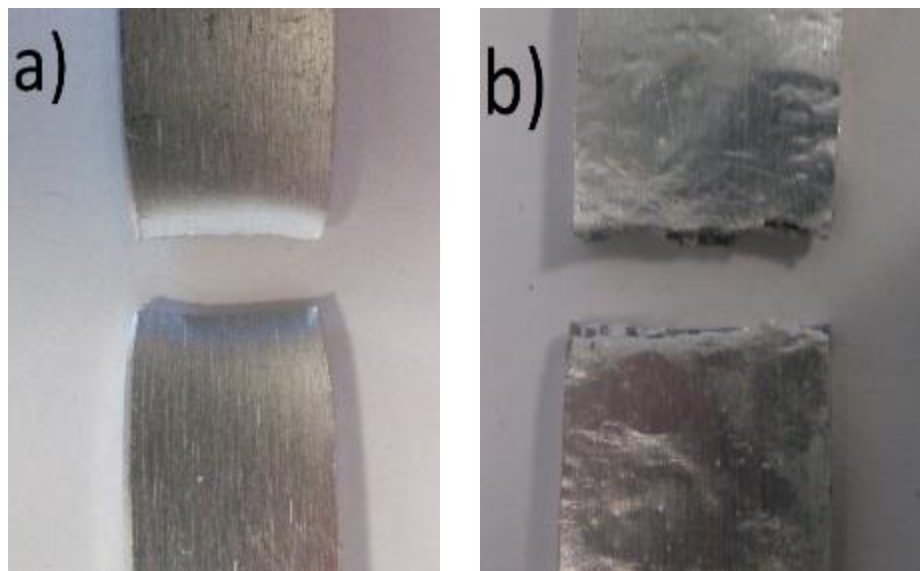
Fracture modes of the test specimens: a) 1050 Aluminium; b) Composite specimen
